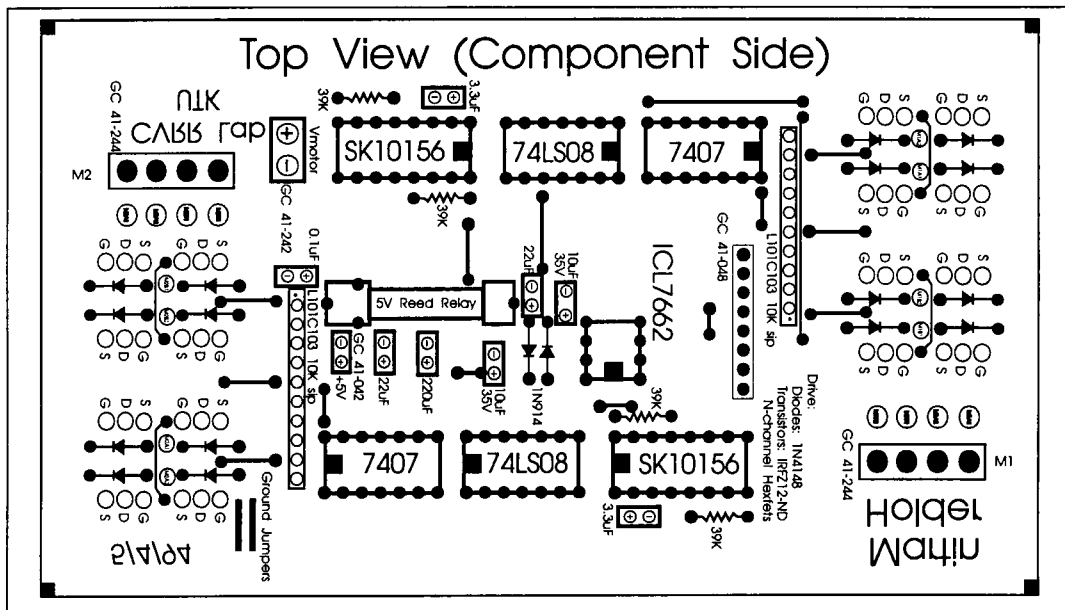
Motor Drive controller's printed circuit board component layout for controlling two stepper motors.
